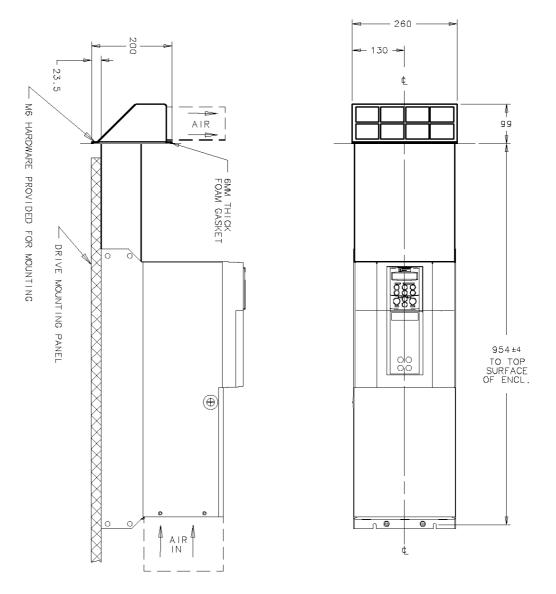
Frame 4: 380-830A External Vent Kit Installation – Drg No. HG466700U002
